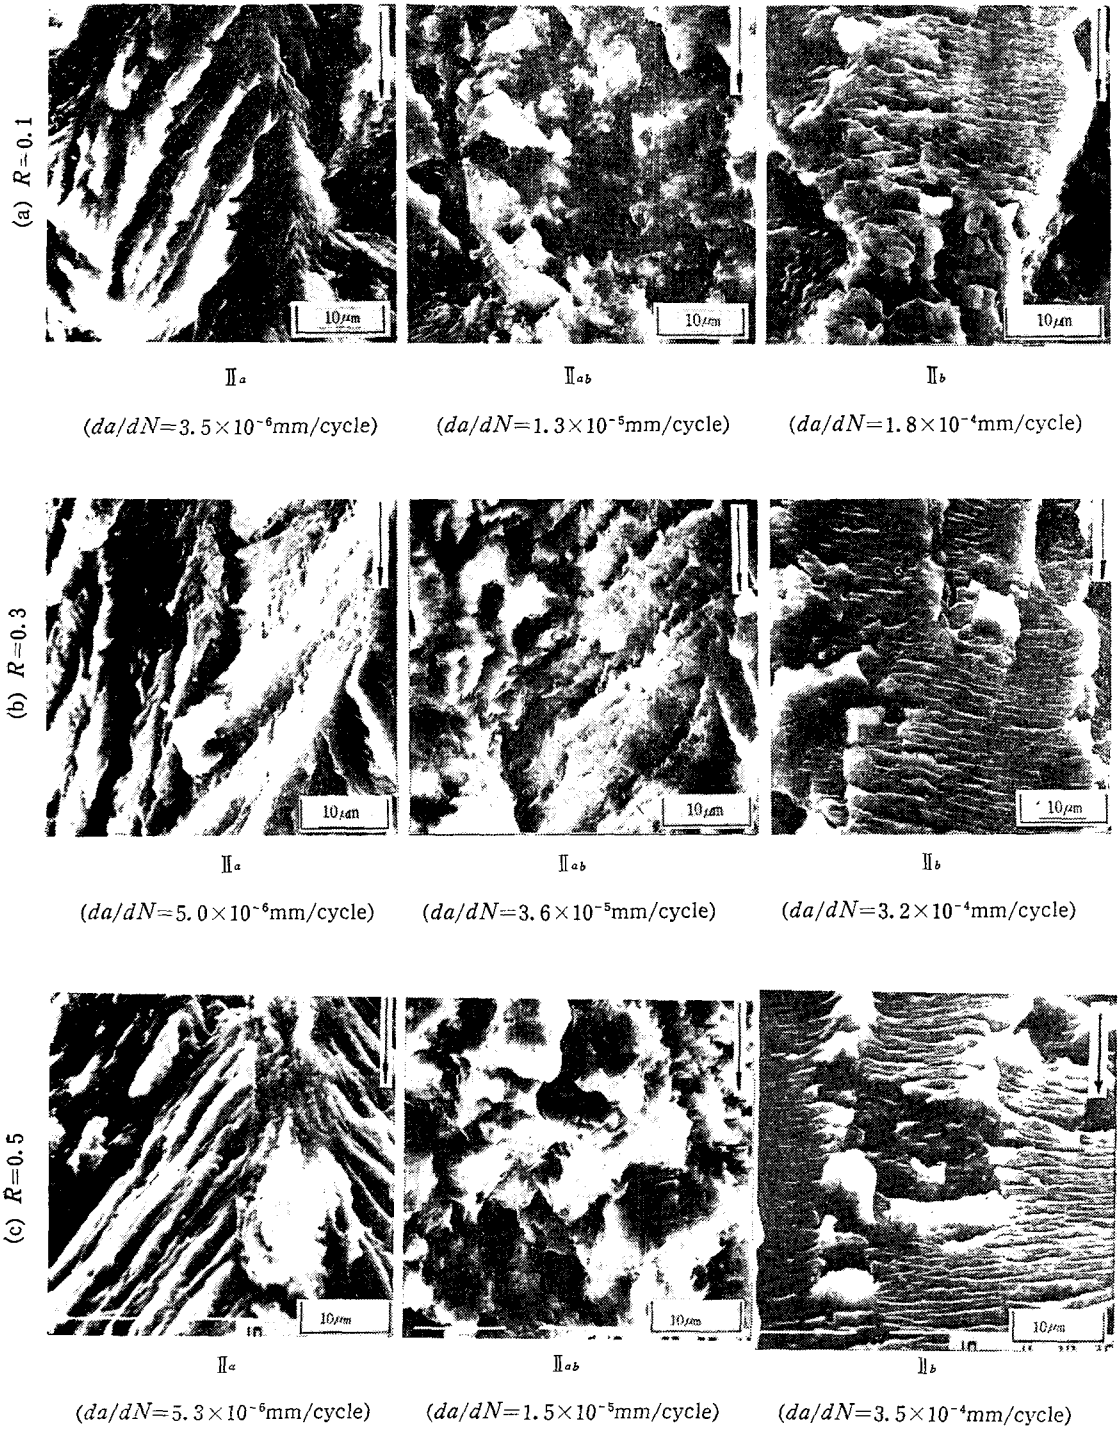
Electron fractographs of fatigue fracture surface
